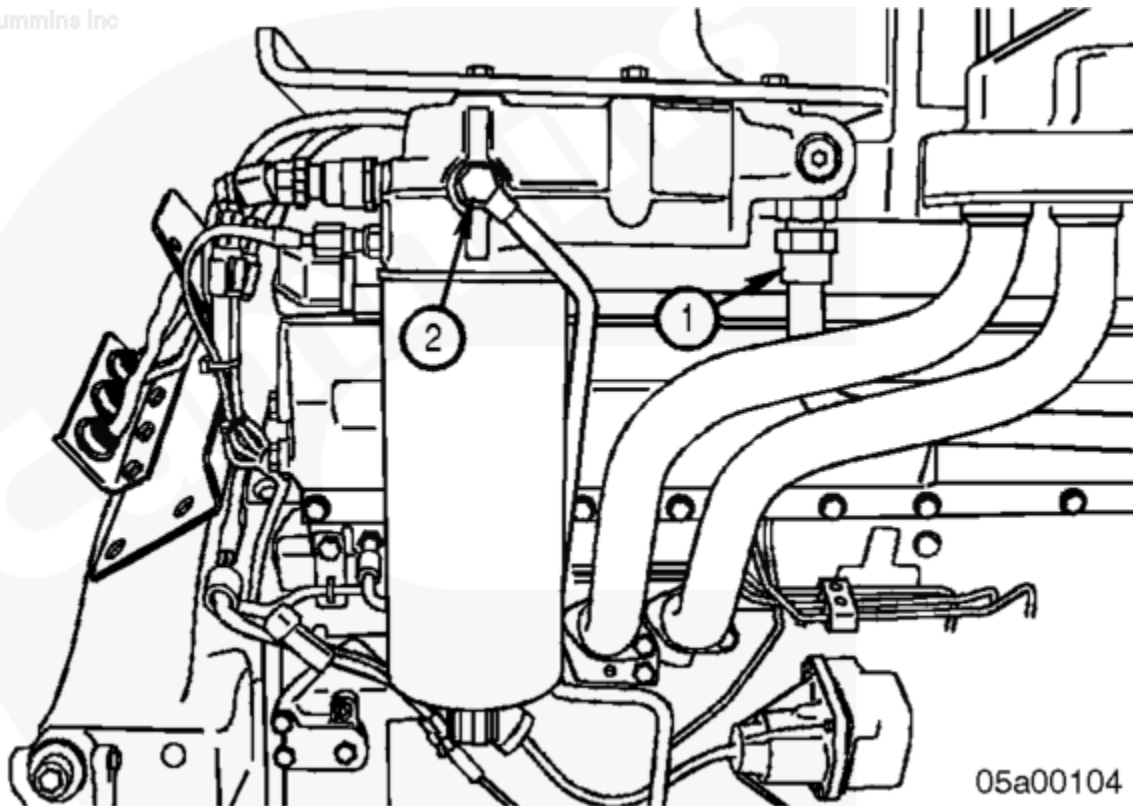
, Fuel Lines Connected to Fuel Filter Head Assembly.
